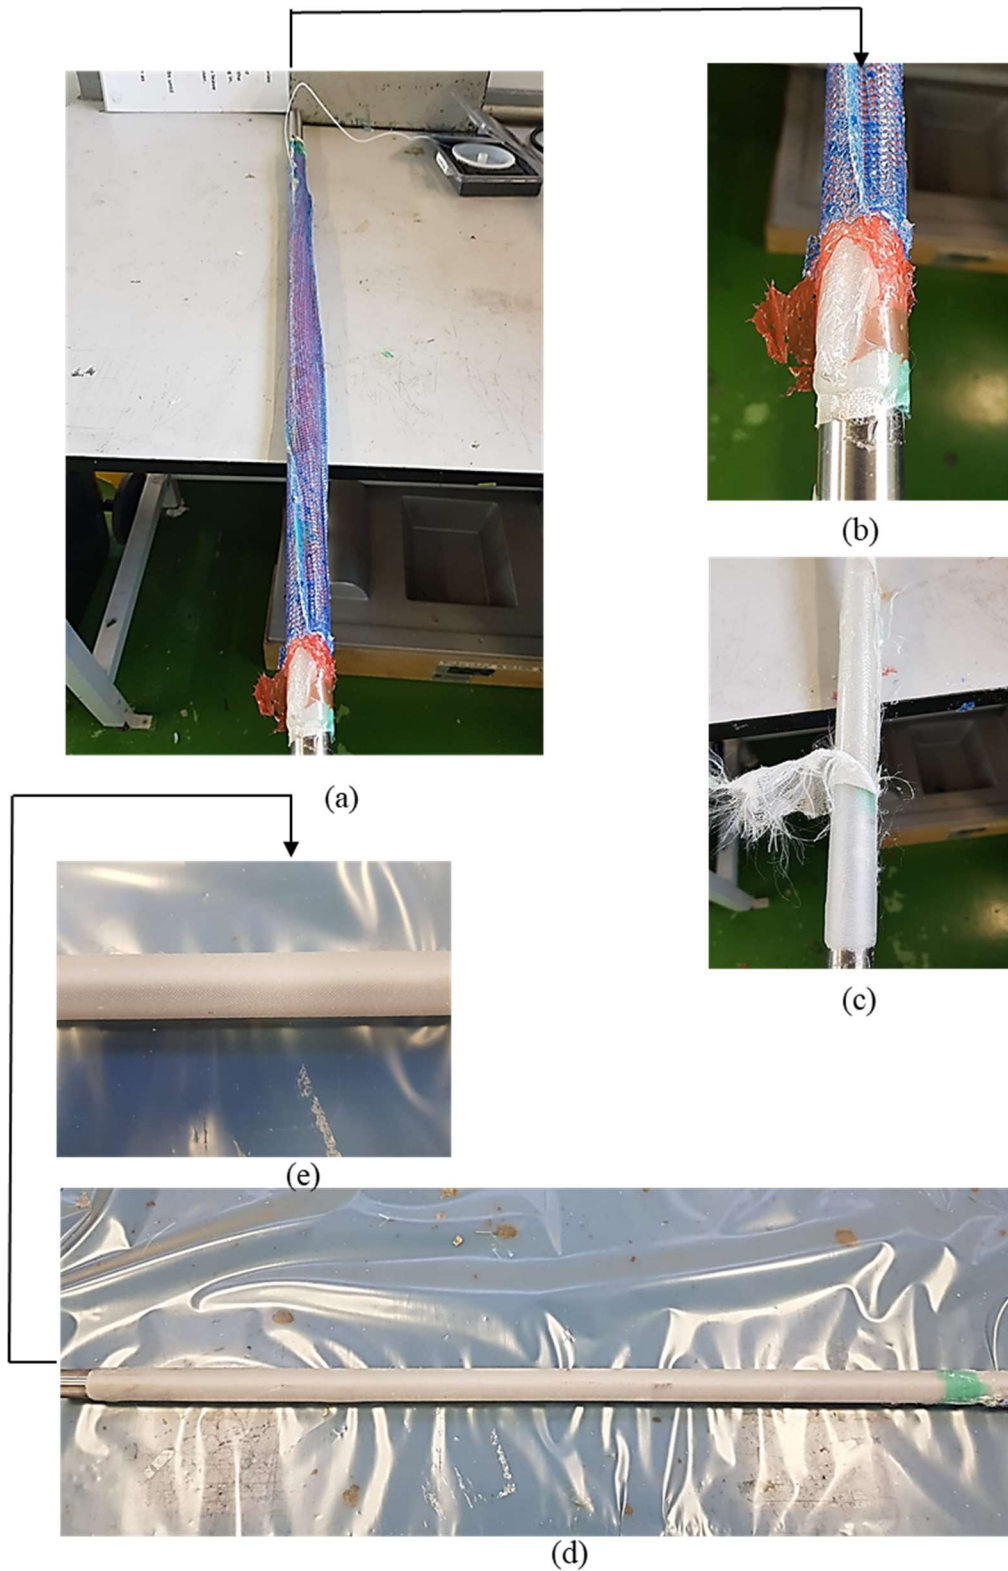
(a and b) shows the interface created by the perforated release film, (c) easy removal of peel ply, (d) composite tube after debagging and (e) zoomed image showing no scratch on the composite tube.
